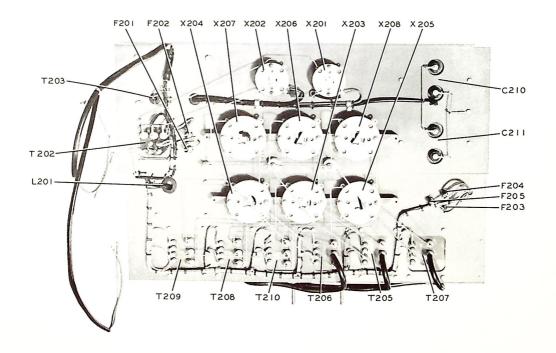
Power Supply Cabinet Rectifier Chassis, Bottom View
